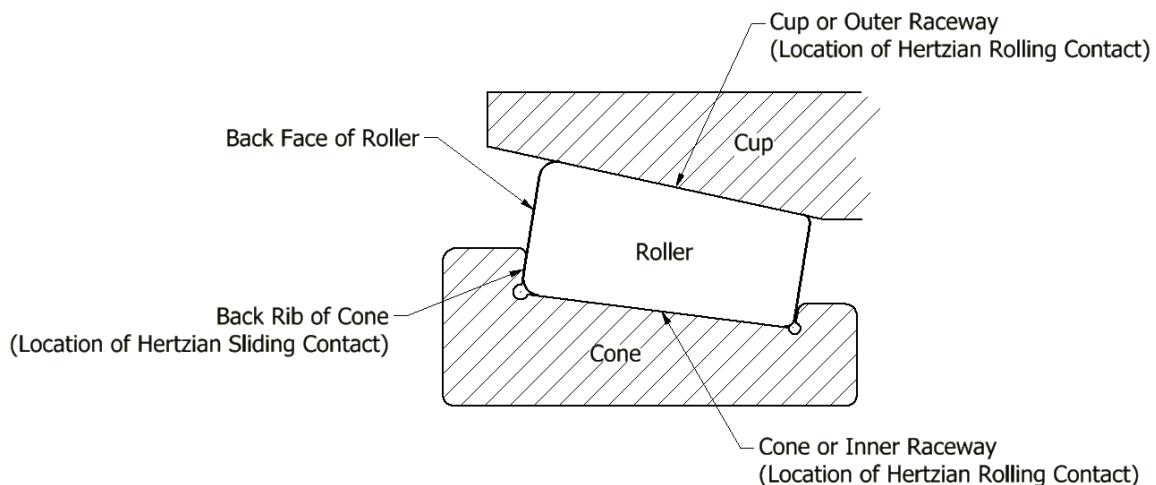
Tapered Roller Bearing Raceway Geometry Nomenclature
